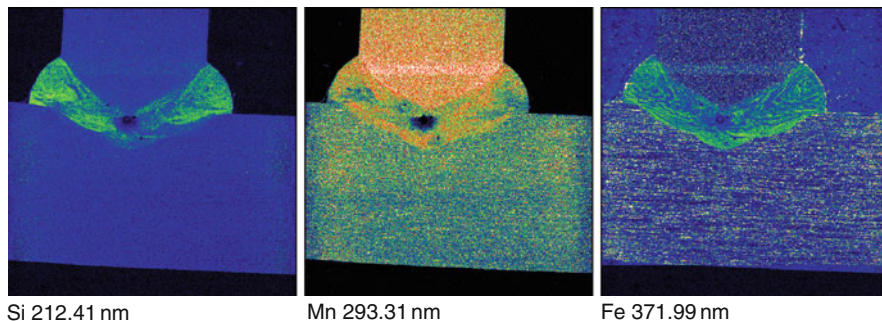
Element maps of the cross section of the weld seam of a T-joint of two aluminum sheets
